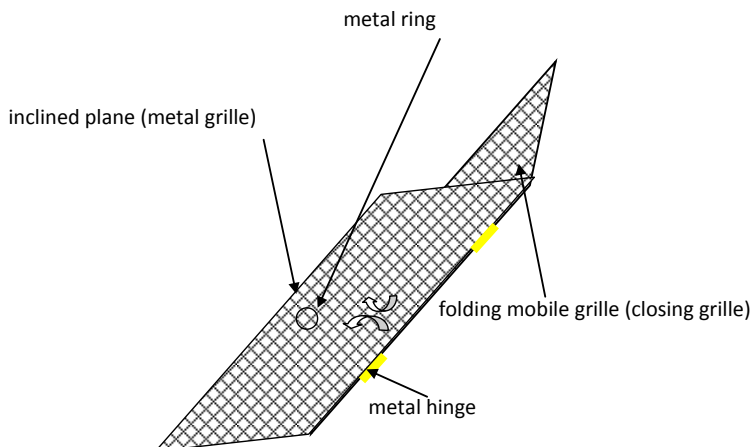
b Positioning the folding mobile grille (closing grille) - indicative scheme
